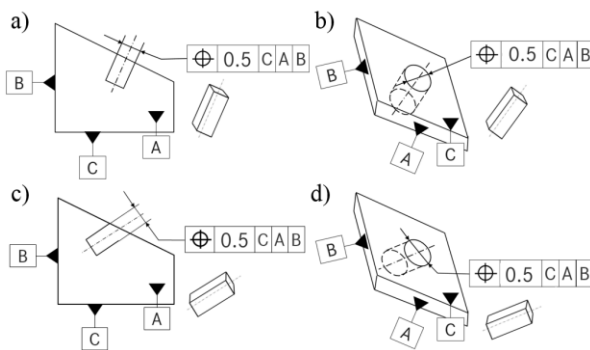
Derivate case without a diameter symbol: (a) the axis is vertical on a component surface with a perpendicular datum system; (b) the axis is vertical on a component surface with a nonperpendicular datum system; (c) the axis is angular on a component surface with a perpendicular datum system; (d) the axis is angular on a component surface with a nonperpendicular datum system.
